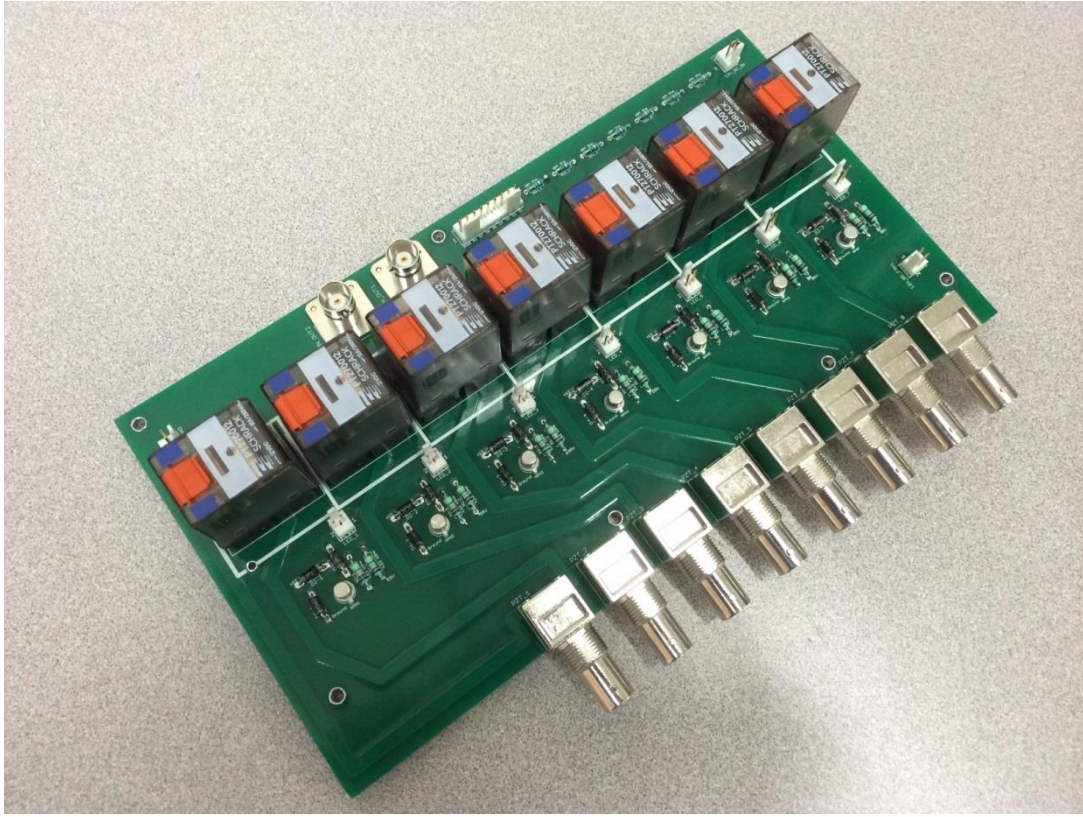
Photograph of the four-layer PCB used to control the relays for actuator phasing.
